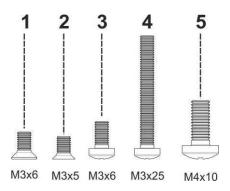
TAU-36.IP/ TAU-72.IP assembling screw types
